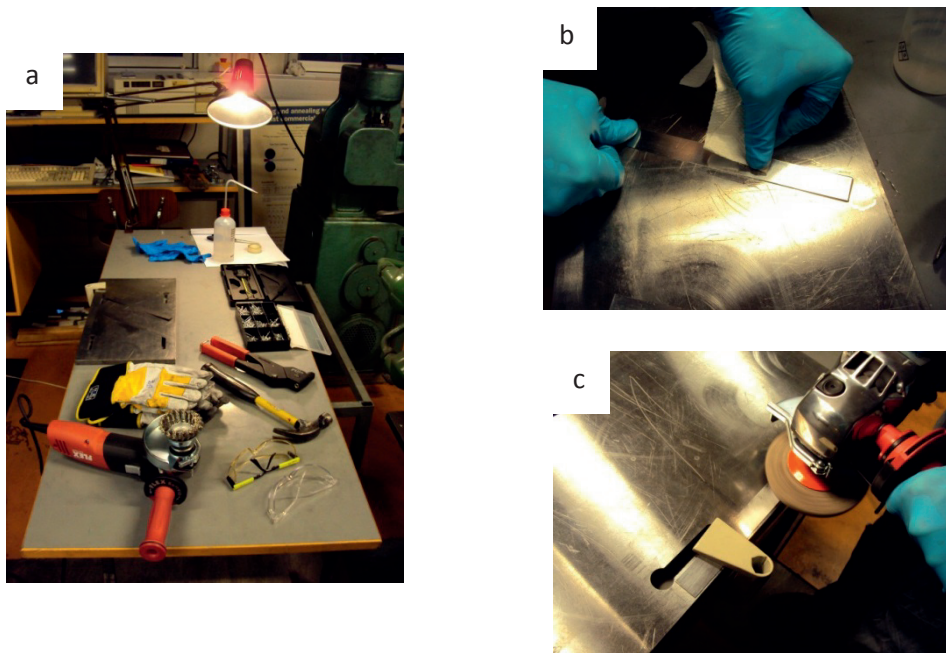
a) Surface preparation equipment, b) degreasing and c) wire brushing process
